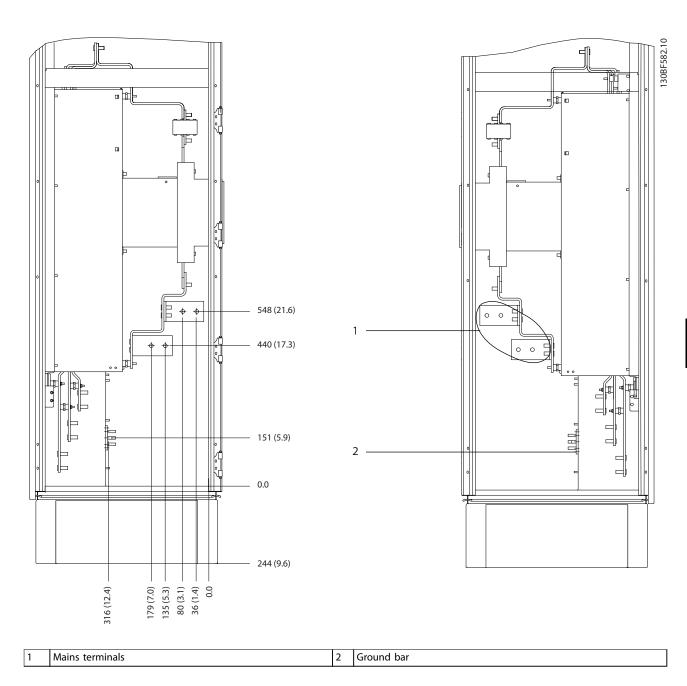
Terminal Dimensions for F11/F13 Options Cabinet, Side View
